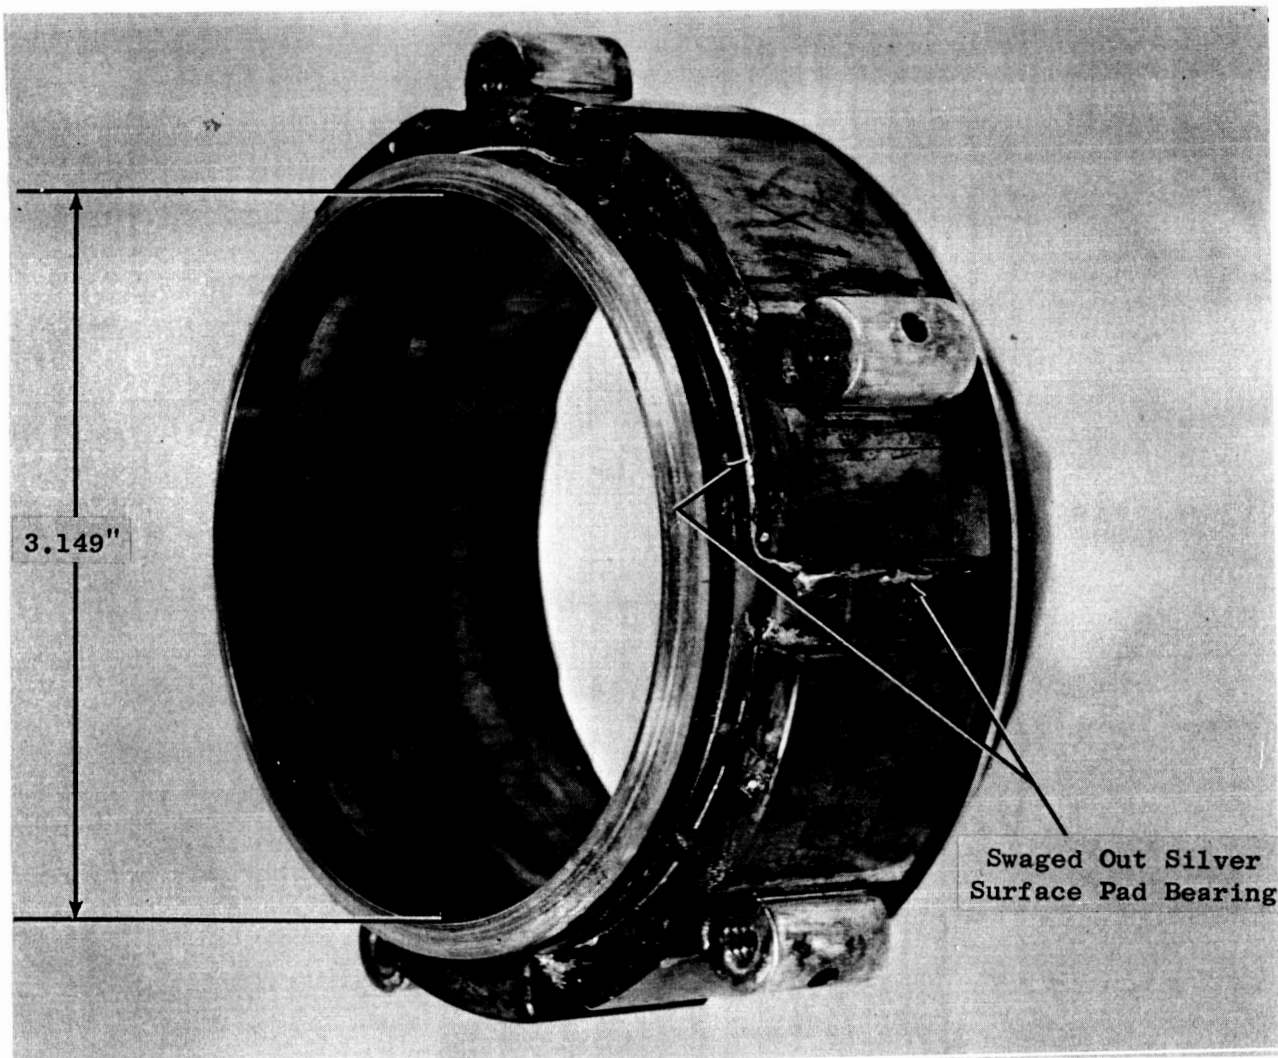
Pivoted Pad Bearing Assembly Showing Pads Welded to Journal.
